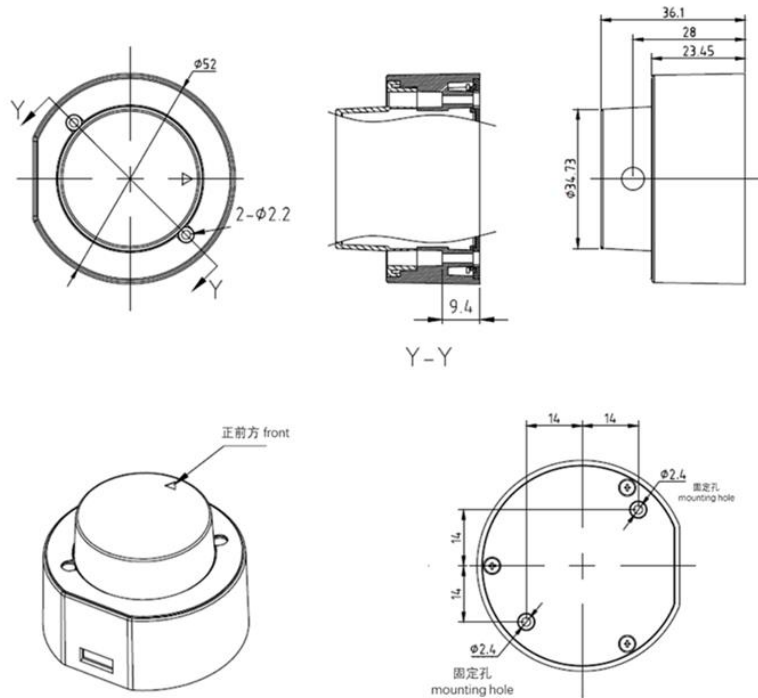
Lidar Mounting and Mechanical Dimensions (unit: mm)
